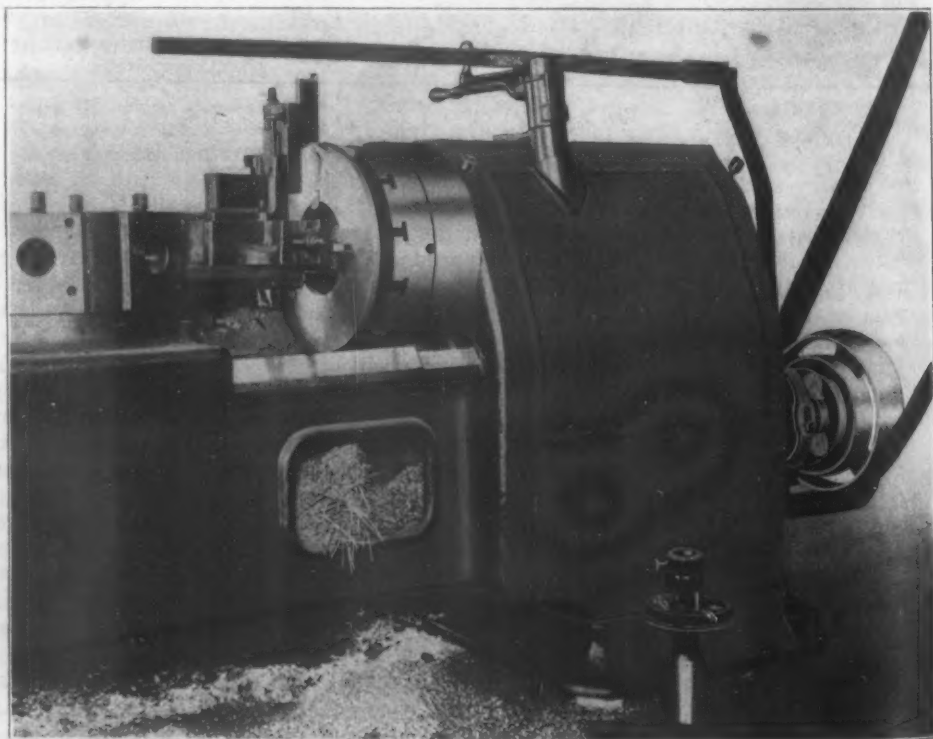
A Turret Lathe Equipped with the New Clutch.
